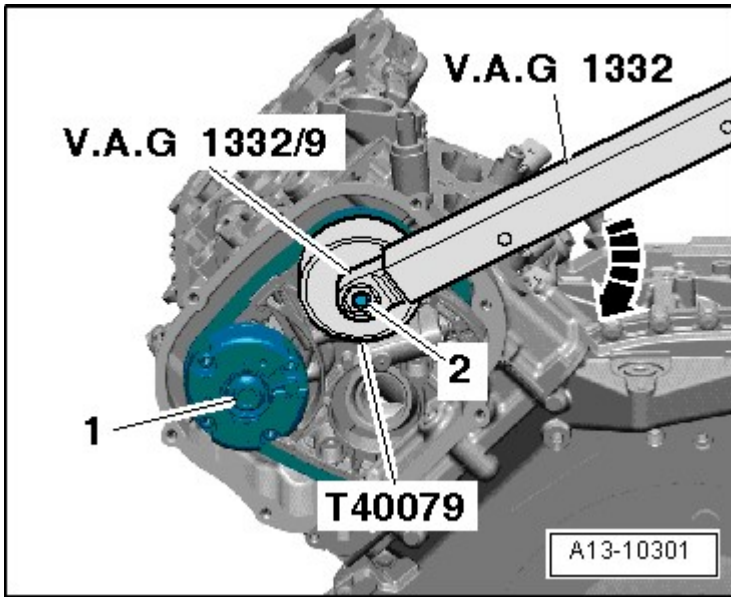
Positioning Adapter T40079 On Intake Camshaft Adjuster At Left Cylinder Head
